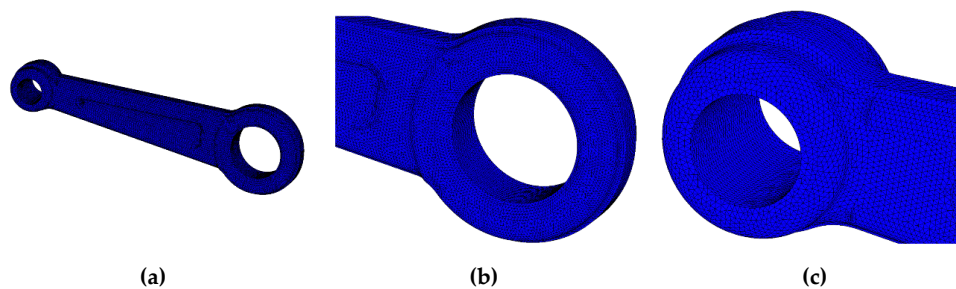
(a) Meshing of the connecting rod; (b) and (c) detail of the meshing at the top and at the bottom of the connecting rod.
